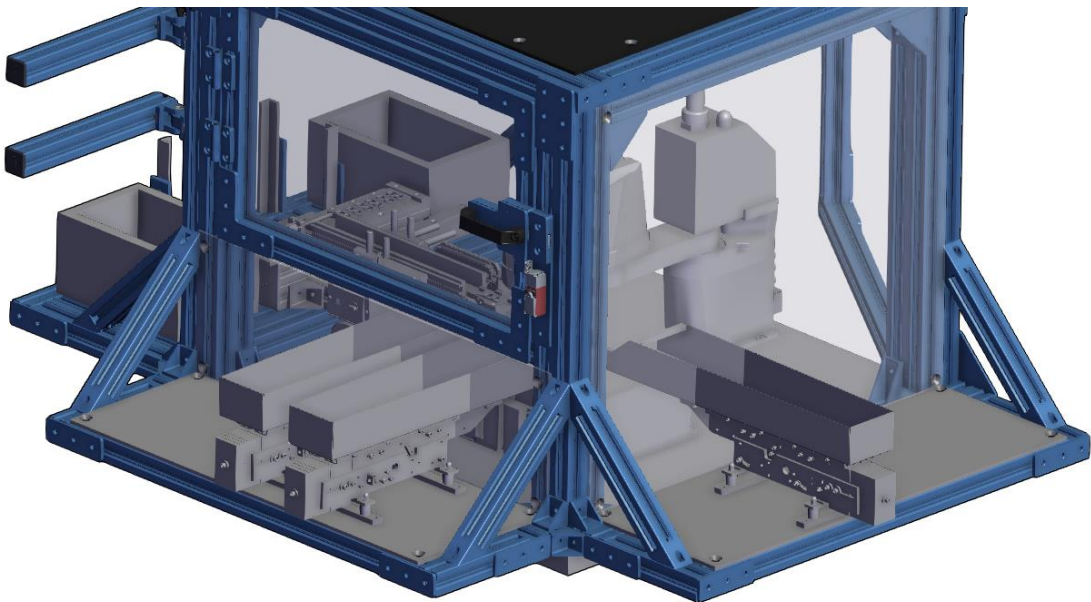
Automated Assembly Cell Part Feeding Hoppers
